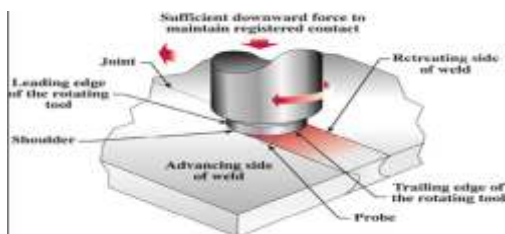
Principle of Friction Stir Welding^[10]
